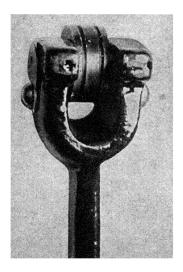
Diamond saw roller used in the making of a diamond-charged disk.
